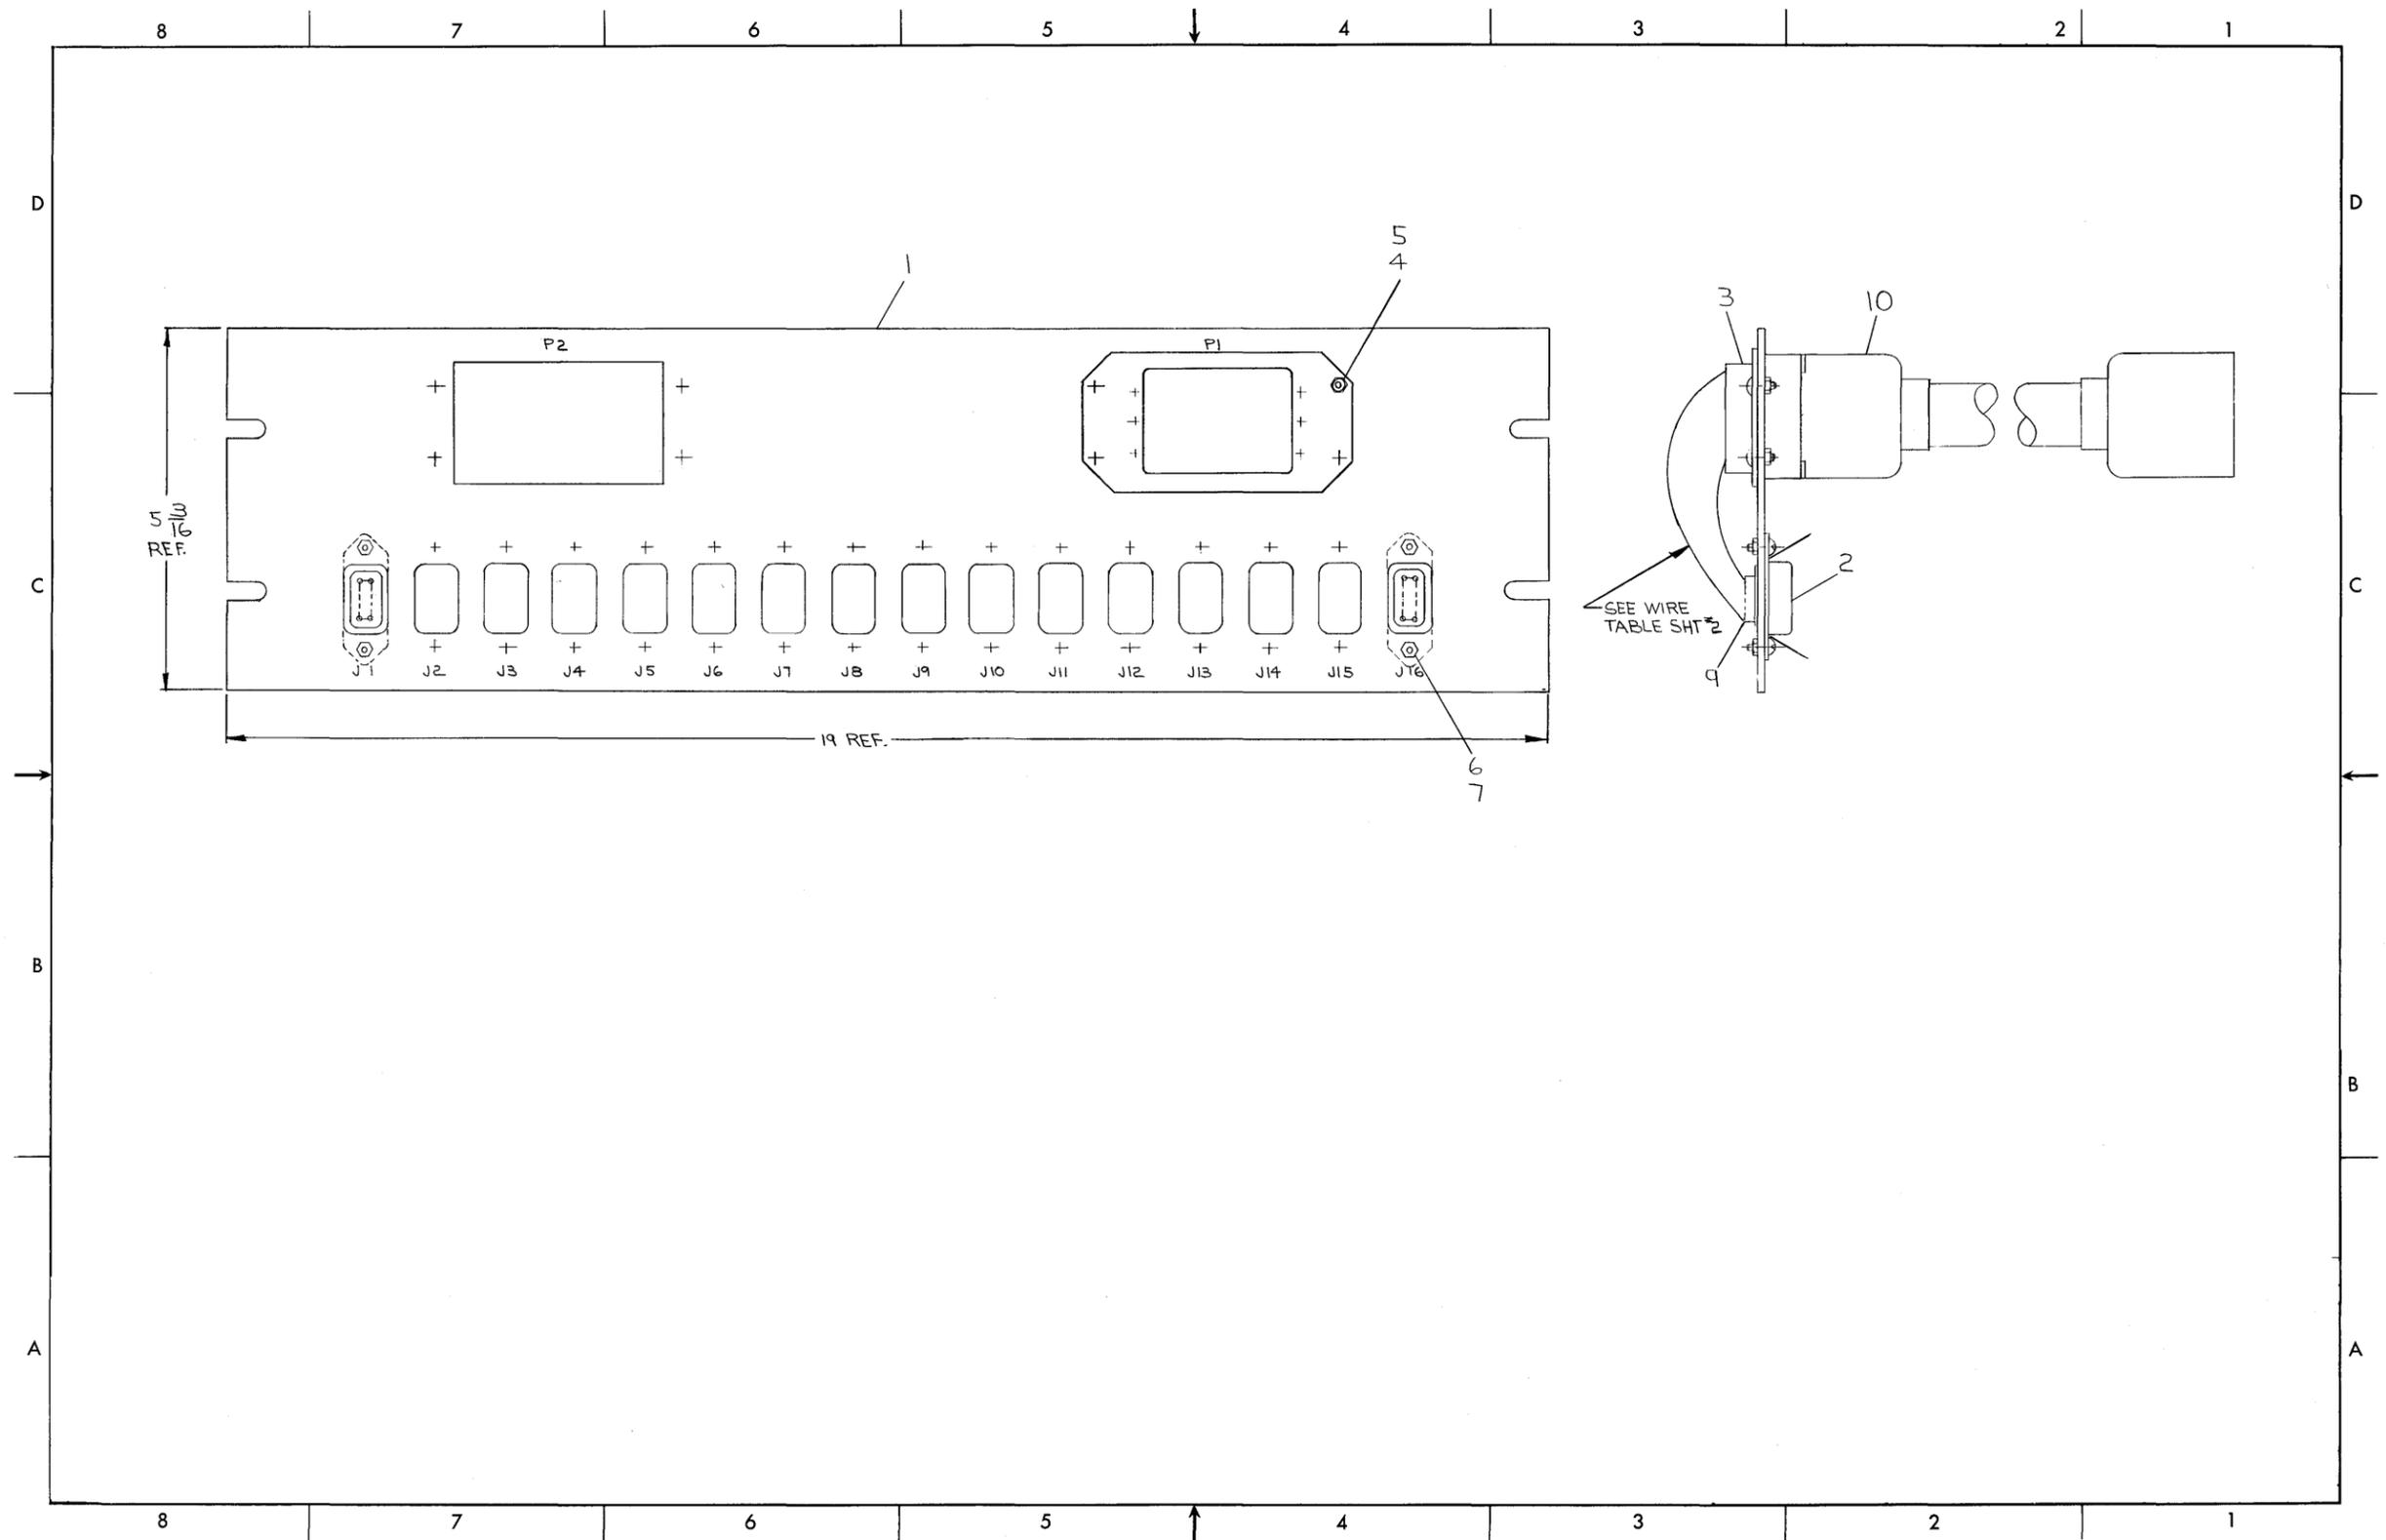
D-UA-H302-0-0 H302 Panel Connector Location Diagram (Sheet 1)
